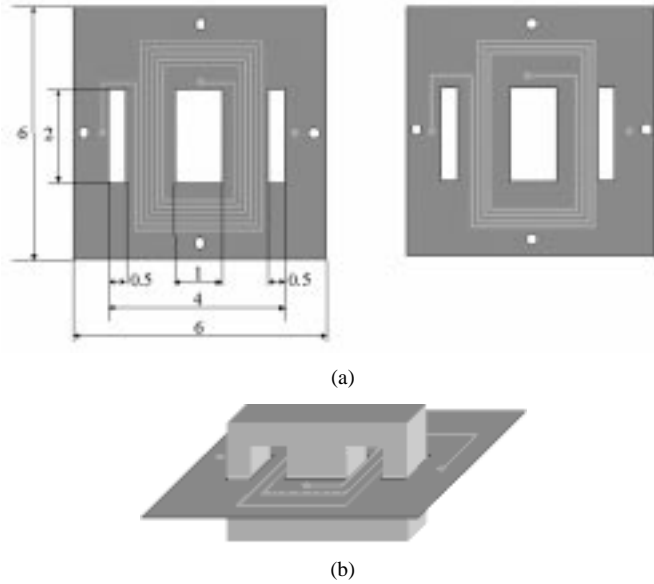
Schematic view (a) of a top view of the coils containing, respectively, 12 and 8 turns, and (b) an assembly of a coil with two E-cores. Dimensions are in mm.
